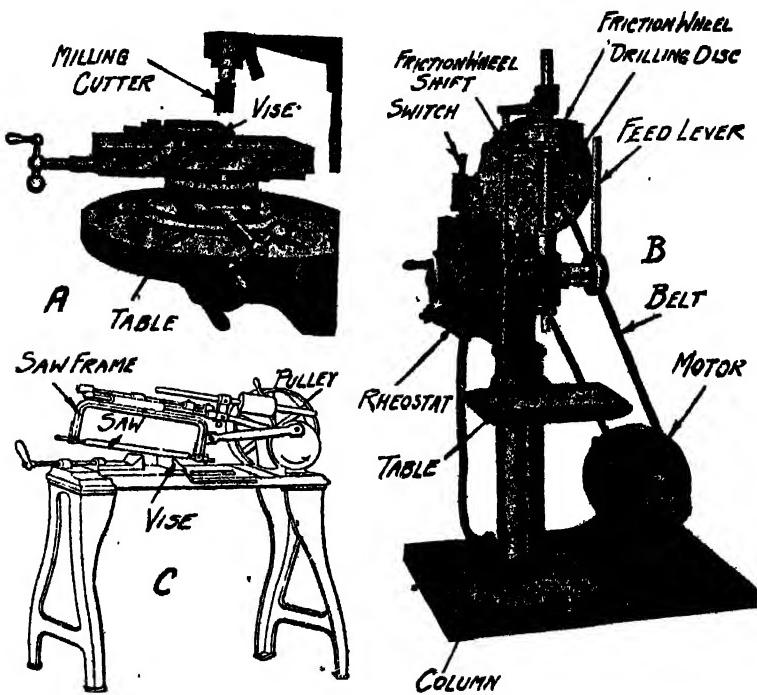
Practical Machine Tools for Small Machine Shop.
